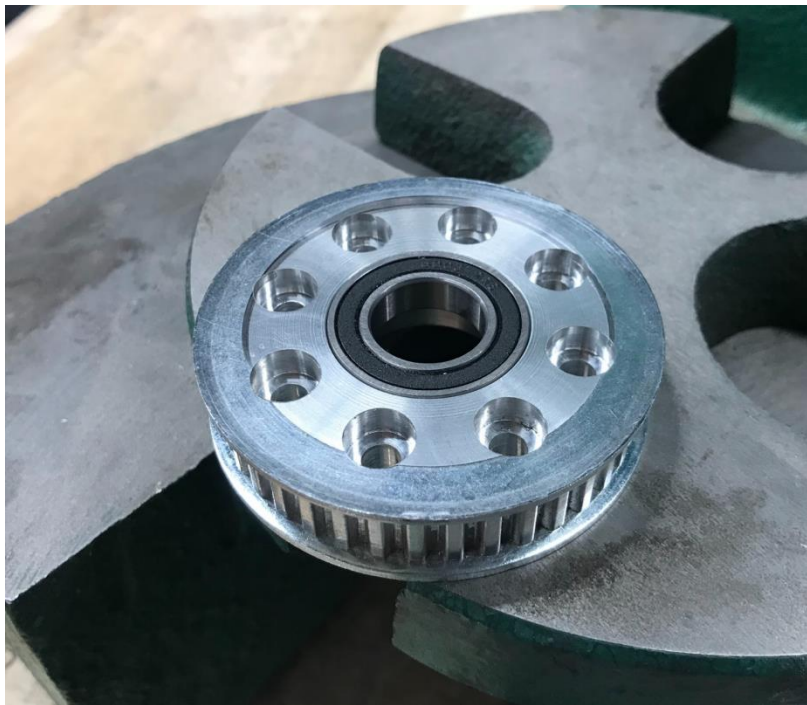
Pressing Bearing into Pulley on Arbor Press
